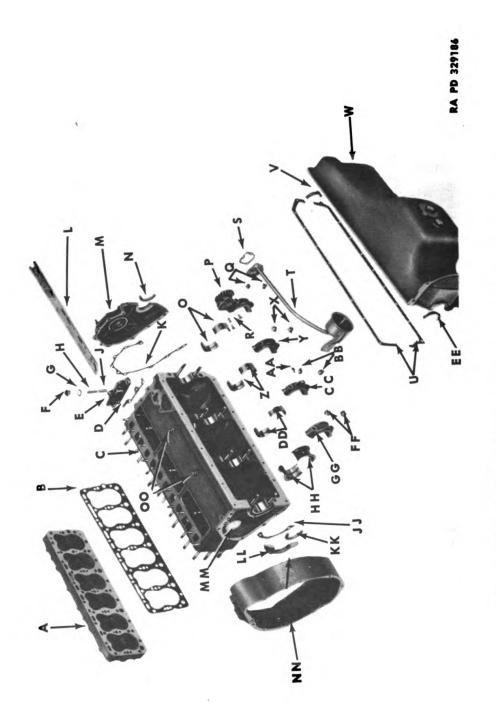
Cylinder Block, Head, Oil Pan, and Bearings
